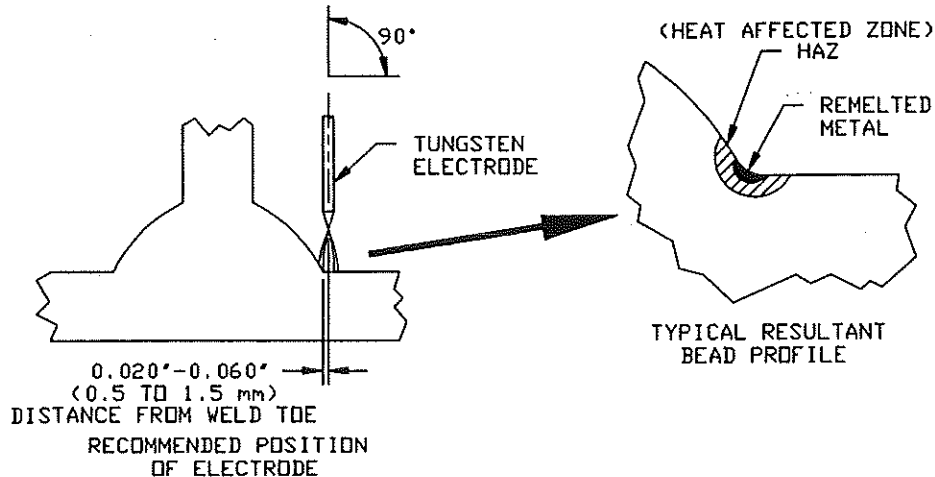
TIG WELD DRESSING RECOMMENDATIONS (T-5089)
